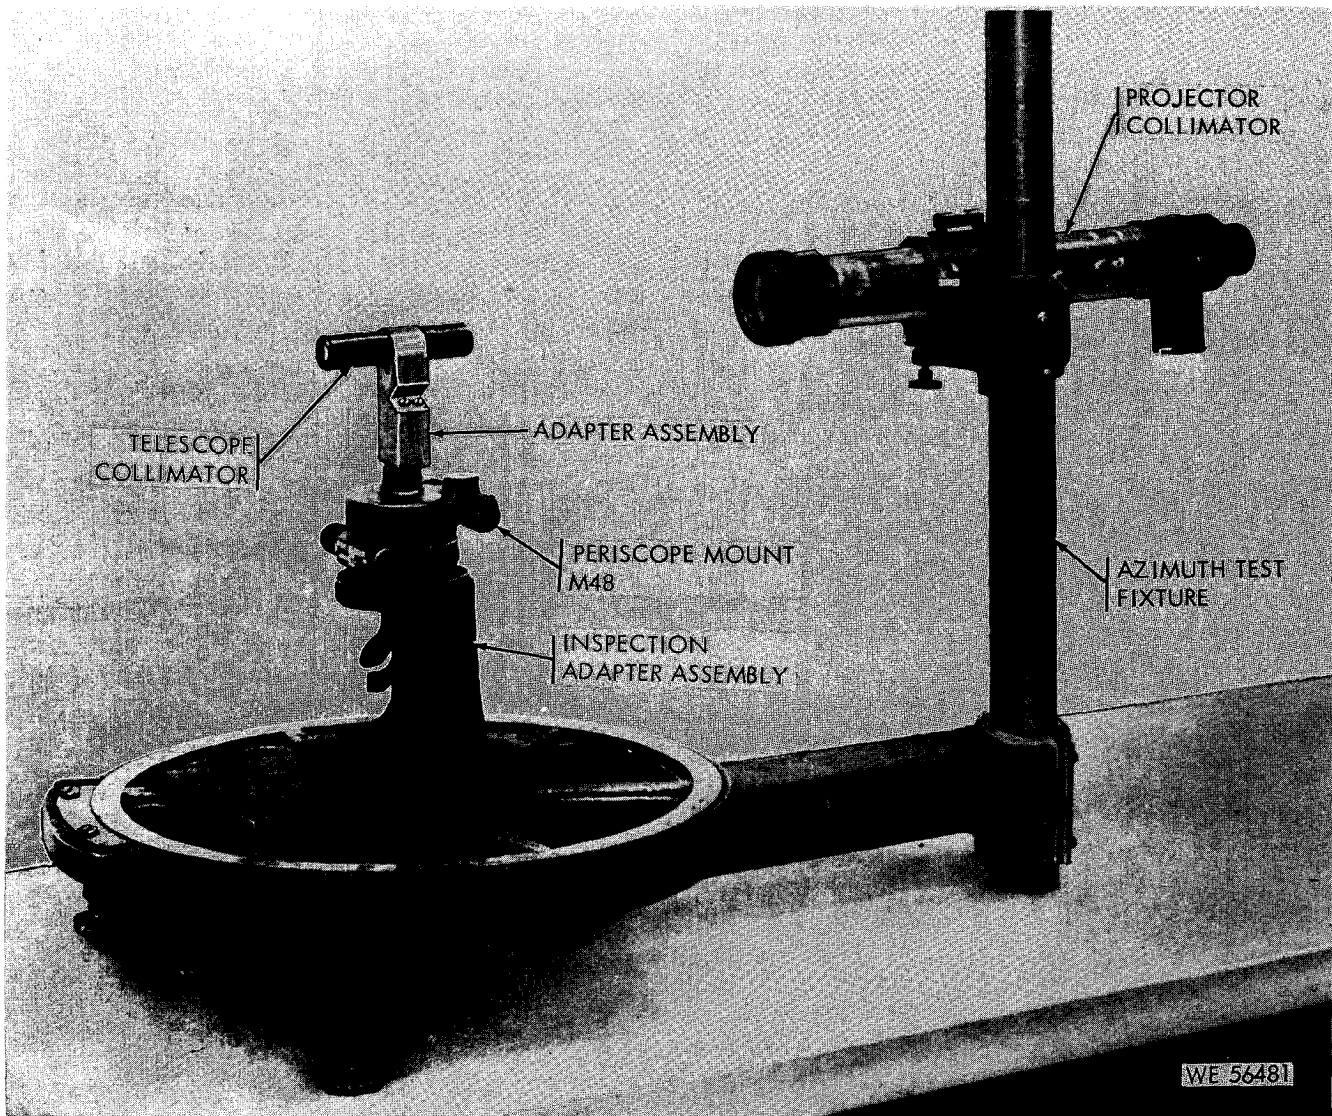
Periscope mount M48 mounted on azimuth test fixture.
